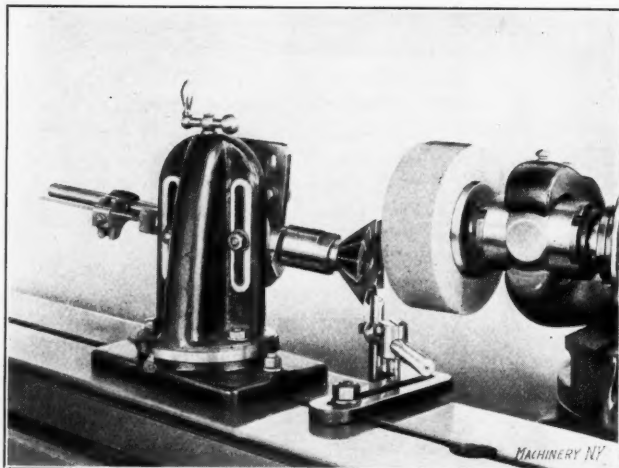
Grinding the End Teeth of an Angular Cutter, supported in the Vise
